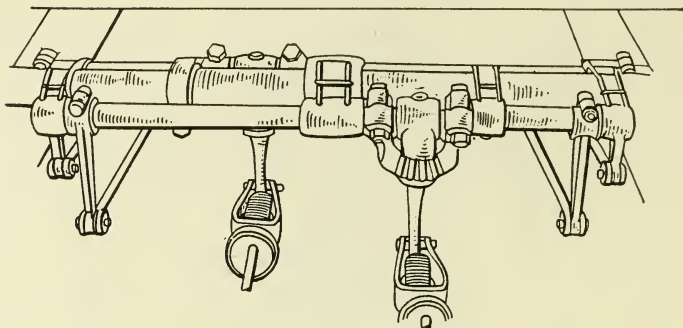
A TRUCK-BRAKE CONTROL EQUIPPED WITH A DIFFERENTIAL EQUALIZER
